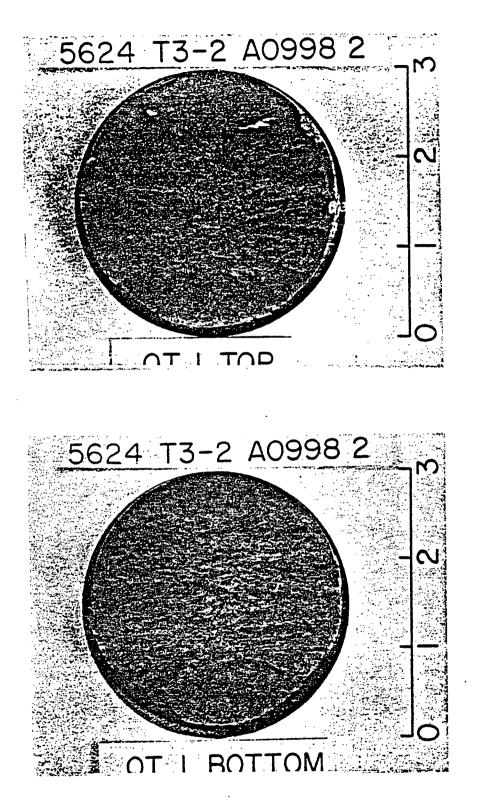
Fracture Surfaces, 5624 T3-2 A0998 2, OT 1
